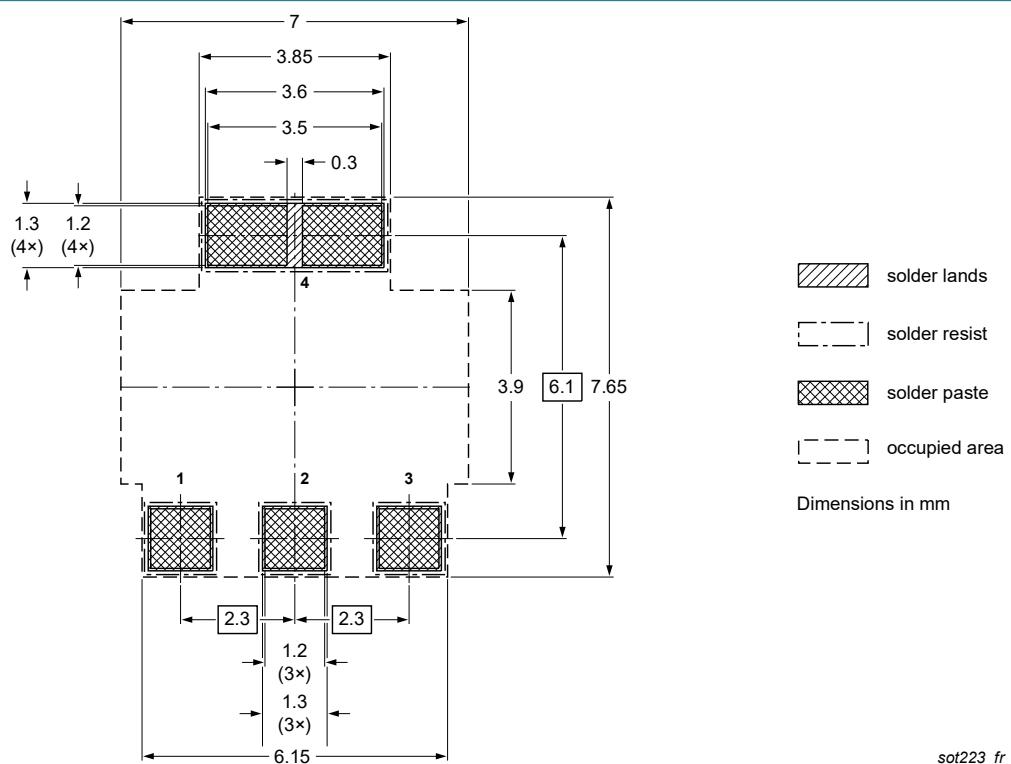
Reflow soldering footprint for SC-73 (SOT223)
